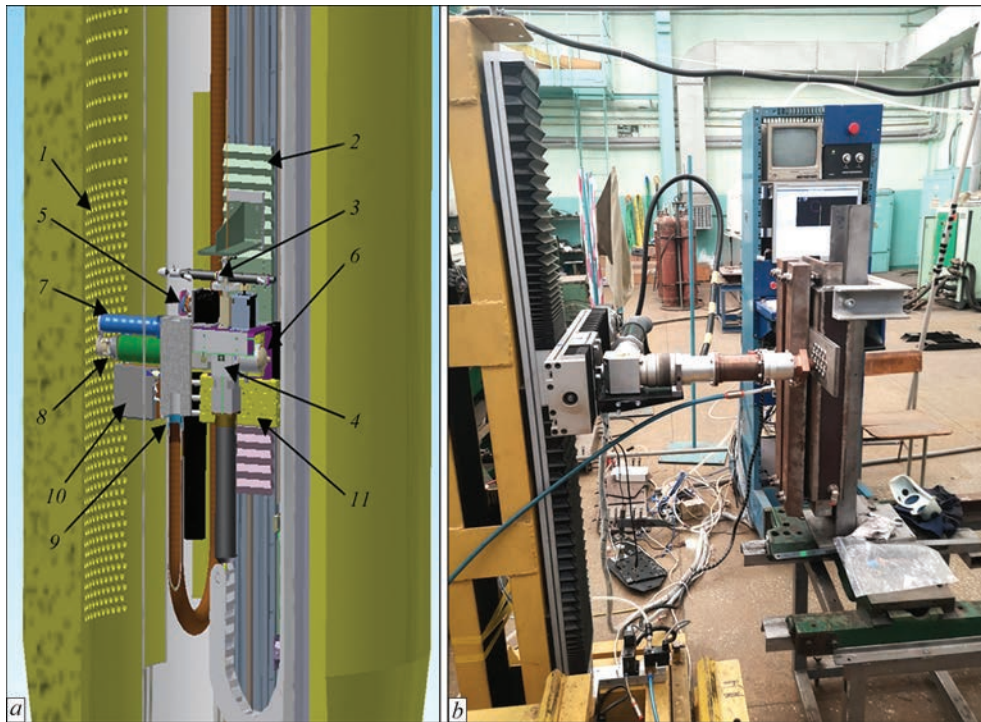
3D-model (a) and working model (b) of equipment for remotely-controlled welding in of steam generator collector plugs: 1 — collector wall; 2 — manipulator carriage; 3 — automatic device for installing the plug; 4 — case of laser welding head optics; 5 — scanner; 6 — video camera; 7 — corrugated hose for removing vapours; 8 — gas protection device; 9 — filtering system; 10 — welding position sensor; 11 — drive of welding position sensor
